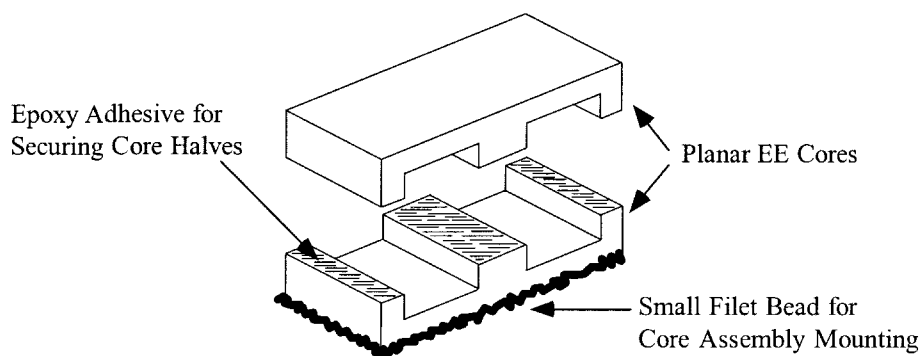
Epoxy Adhesive for Securing Transformer Assembly.
